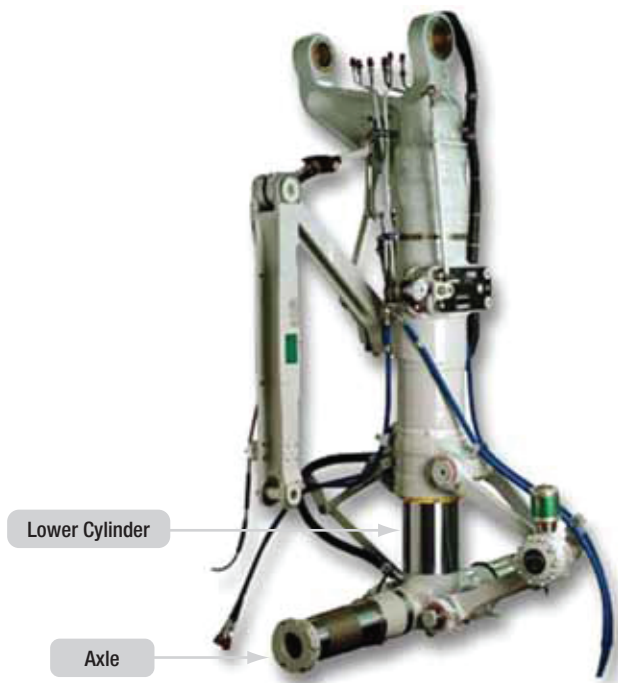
Axles machined out of the same material as the landing gear lower cylinder.
